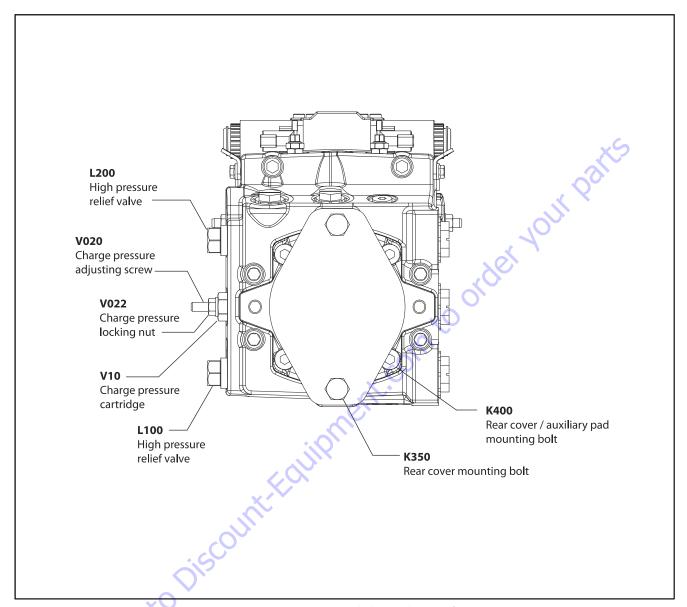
Fasteners and Plugs - Sheet 1 of 2
